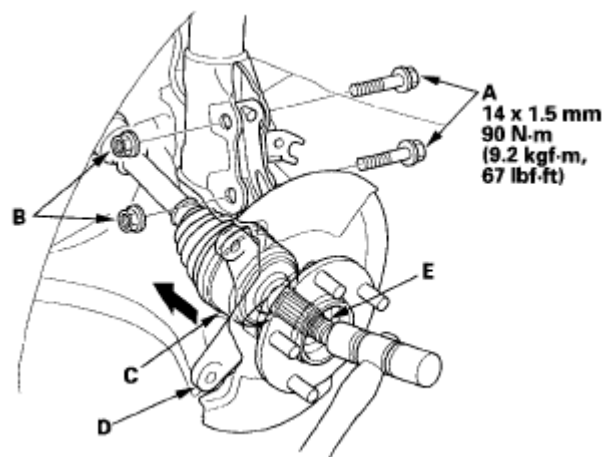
Identifying Damper Pinch Bolts (With Torque Specifications)
